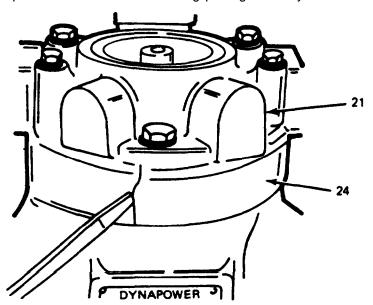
Marking Across the Cover/Housing Parting Line.
